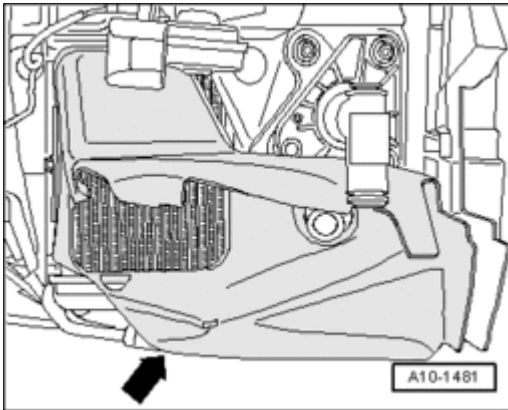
Removing Right Air Guide In Front Of Auxiliary Cooler
